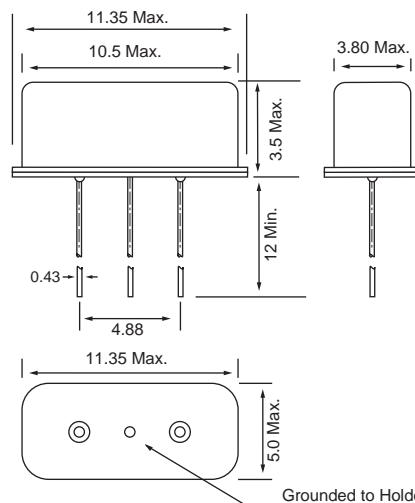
HC-49US - 3rd In Line Lead Base - Side & Bottom View
